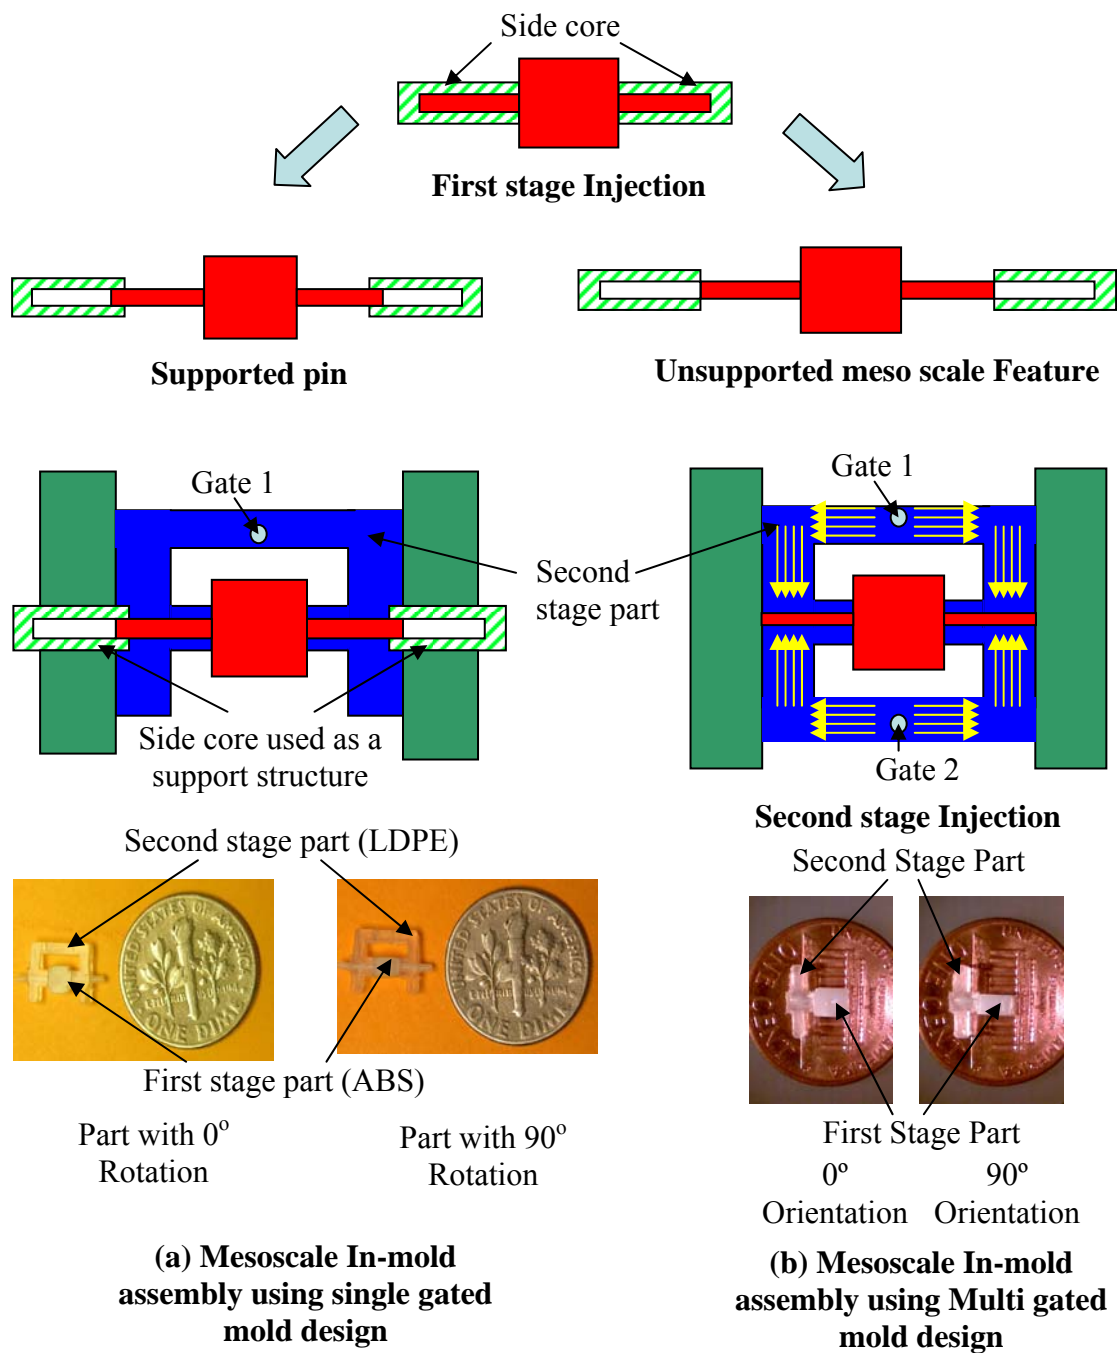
Mold design solutions for realizing mesoscale in-mold assembled revolute joints
